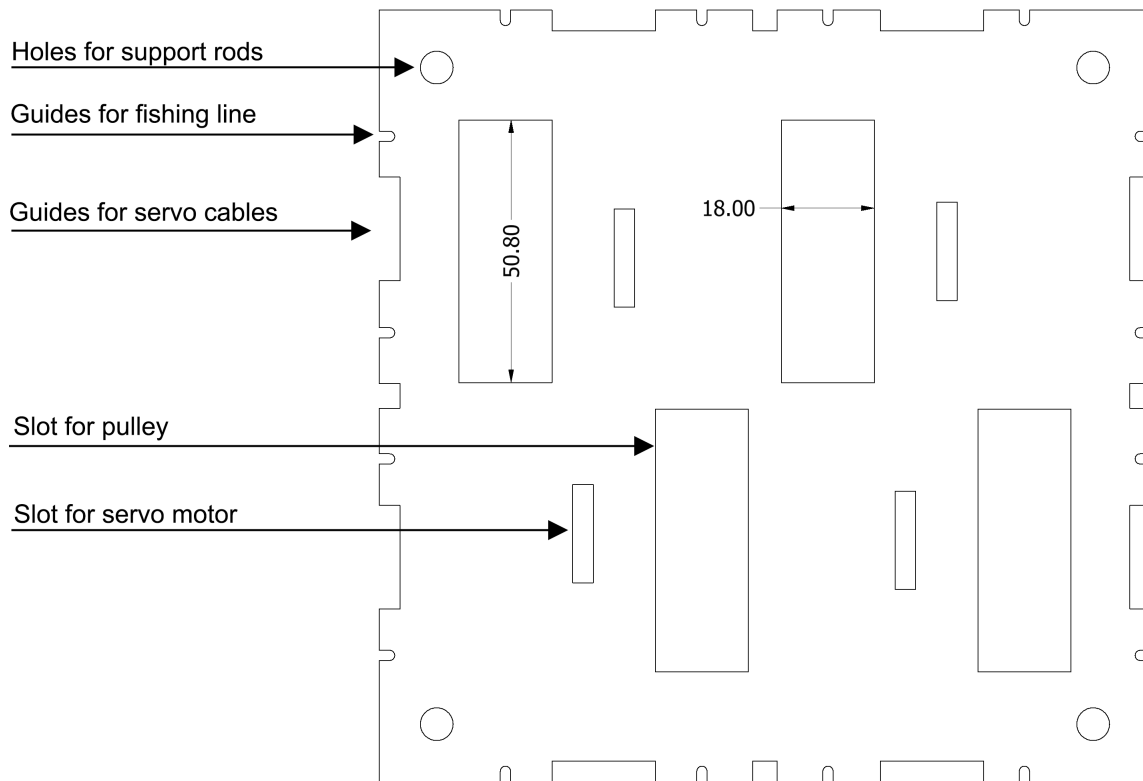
Dimensional details of the bottom plate of the servo assembly
